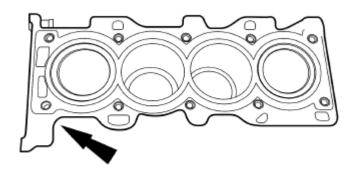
Locating Head Gasket Courtesy of FORD MOTOR CO.
